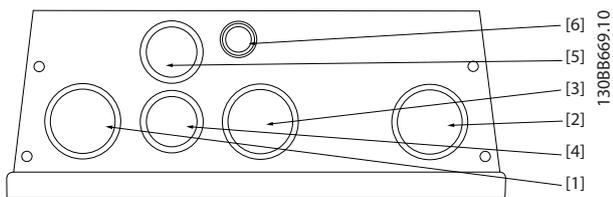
B1 - IP55 Threaded Gland Holes
